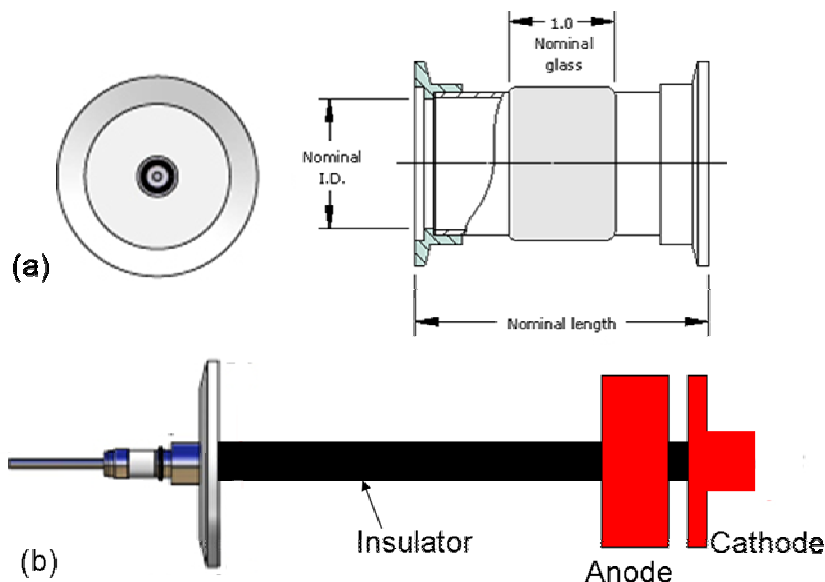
17 (a) A double sided glass adapter and (b) electrical feed through with the electrode assembly.
